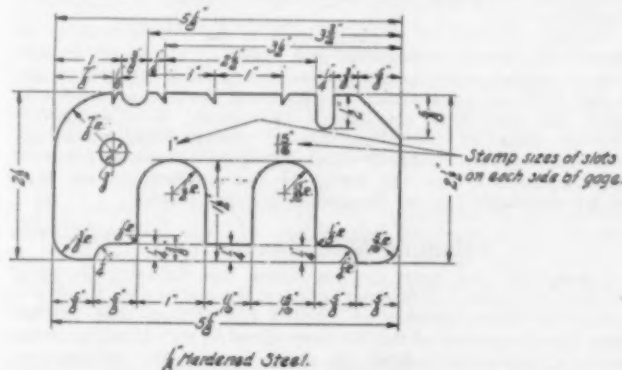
Wheel Defect, Worn Coupler Limit, Worn Journal Collar and Journal Fillet Gage
